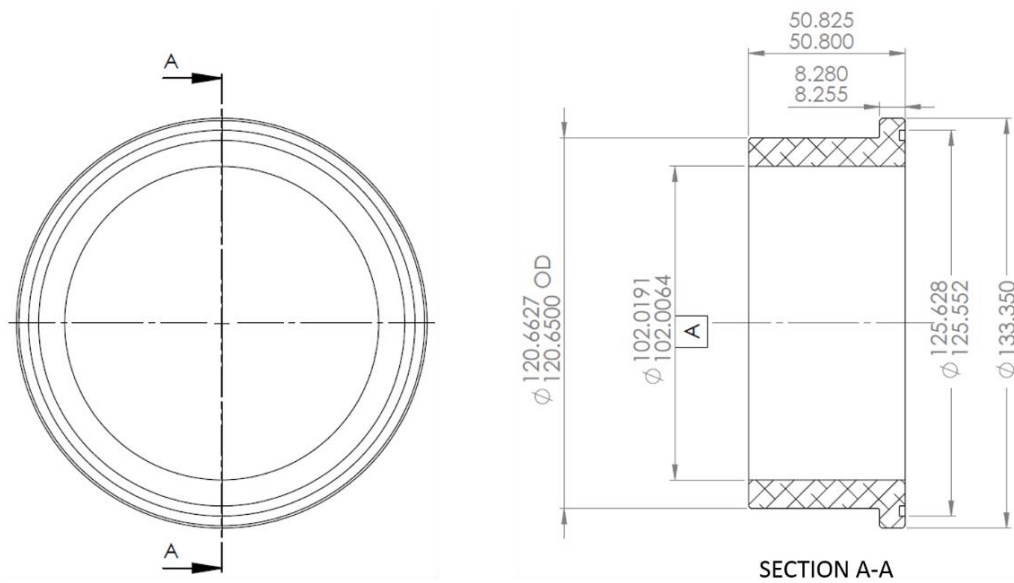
Detailed drawing of seal stator. All dimensions are in mm.
